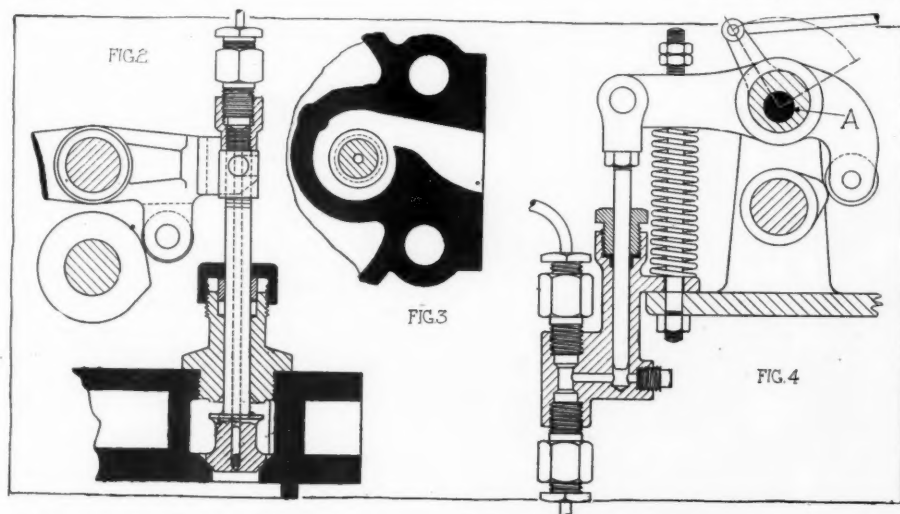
Vertical section through valve, showing fuel duct through center of valve stem. Fig. 3—Horizontal section through valve chamber, showing spiral form of air passage. Fig. 4—Fuel pump mechanism. The eccentric for varying the stroke is shown at A
